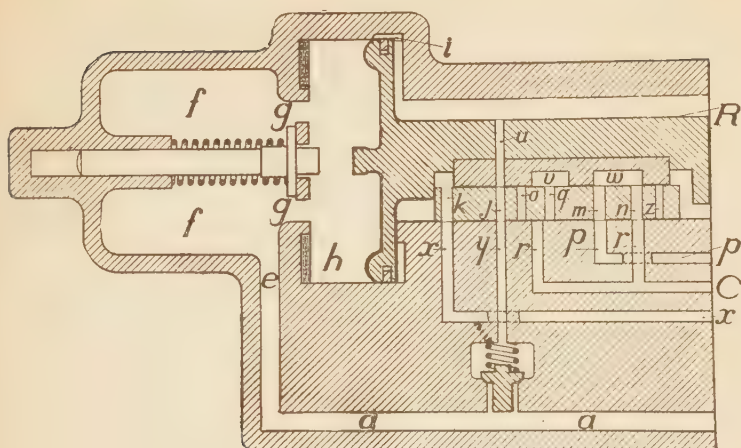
THE T TRIPLE VALVE, RELEASE POSITION
